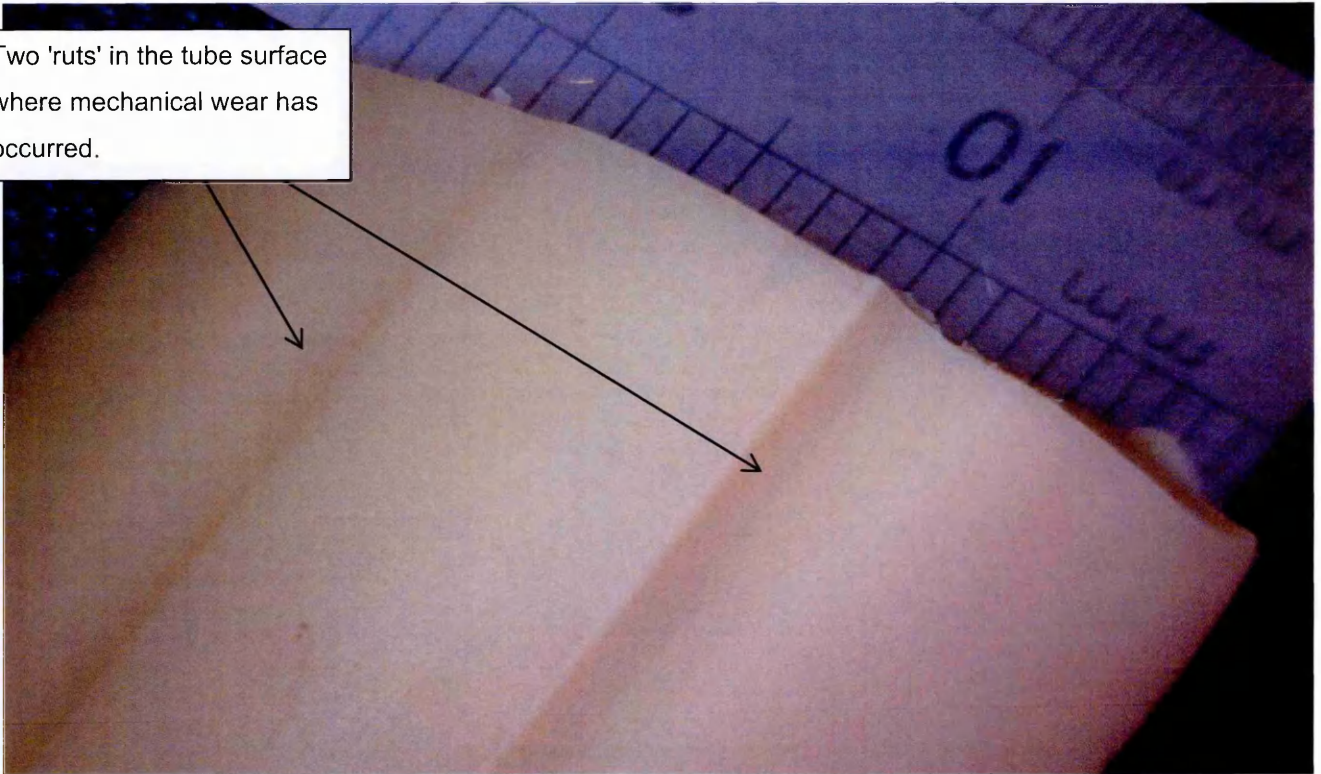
Section 1 through an EPDM/PP blend tube showing damage due to mechanical wear
